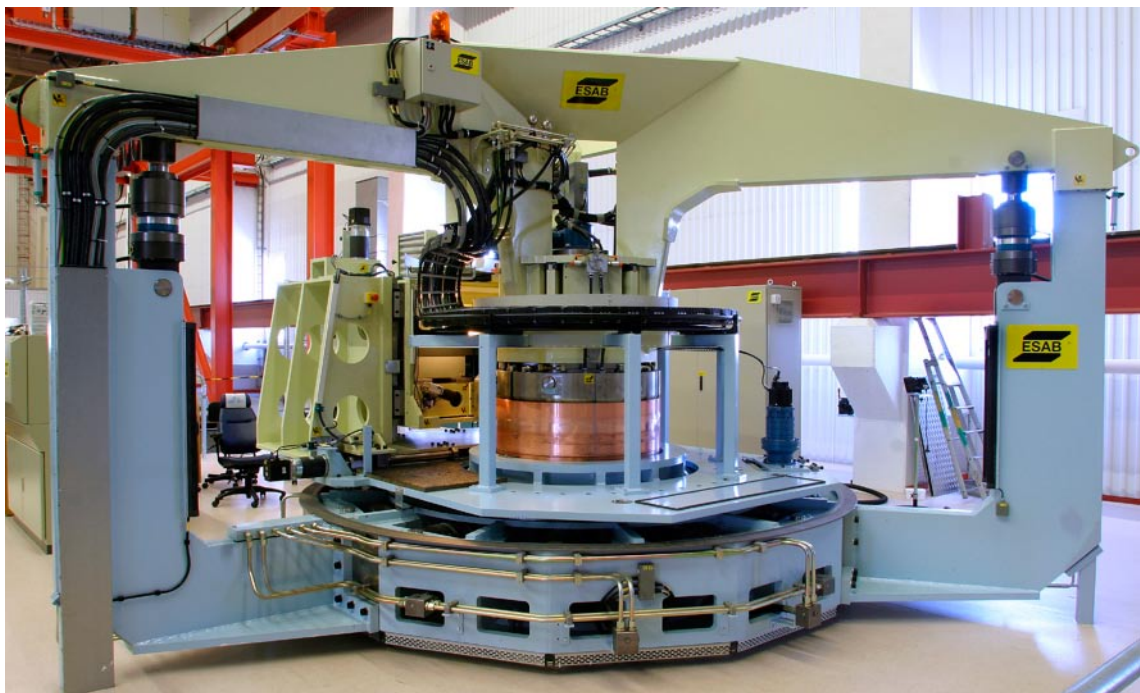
The welding machine at the Canister Laboratory.
